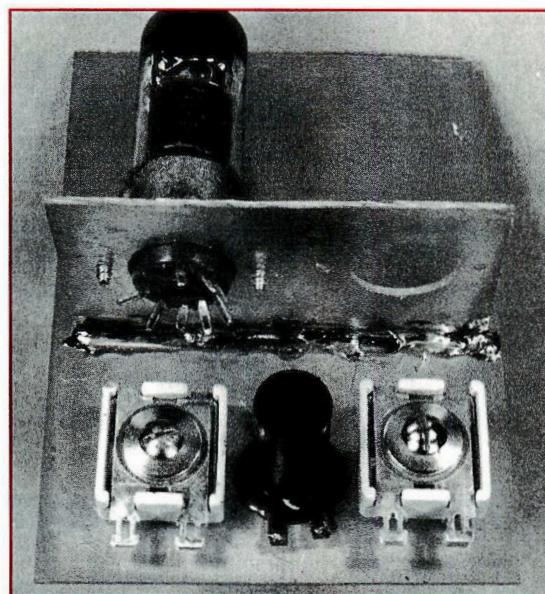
The transmitter (for c.w. use in this example) under construction, using the p.c.b. material technique. The un-used hole for the modulator valve, clearly demonstrates the neat cut which can be used with a standard chassis punch.
